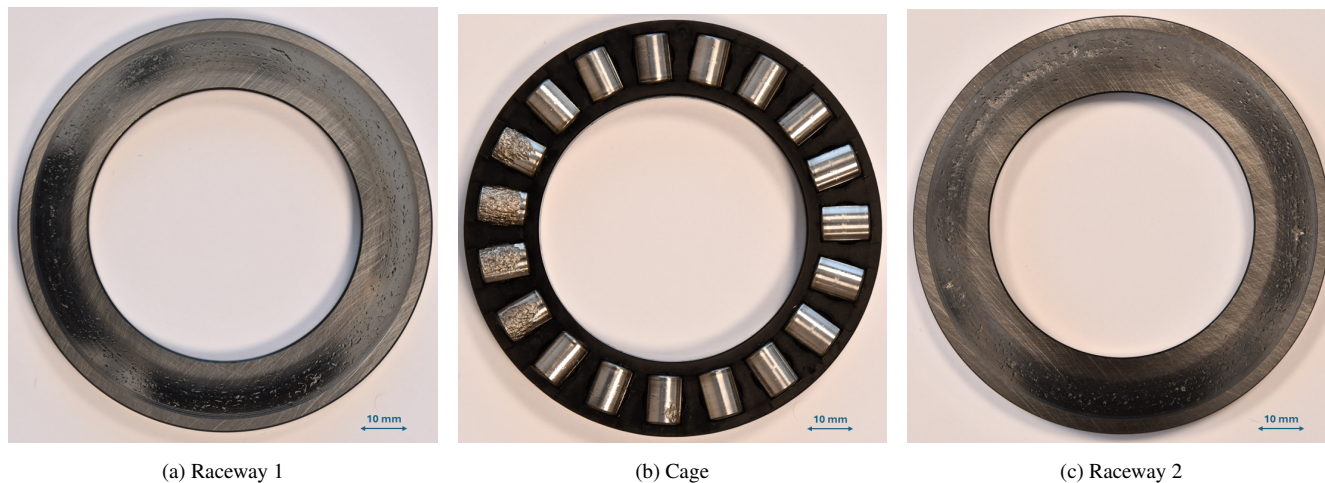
Pictures of bearing components for Bearing 1 of T04. Refer to Table 5 for designation of tests. The outer diameter of the bearing is 95 mm and the diameter and length of the rollers are both 11 mm.
